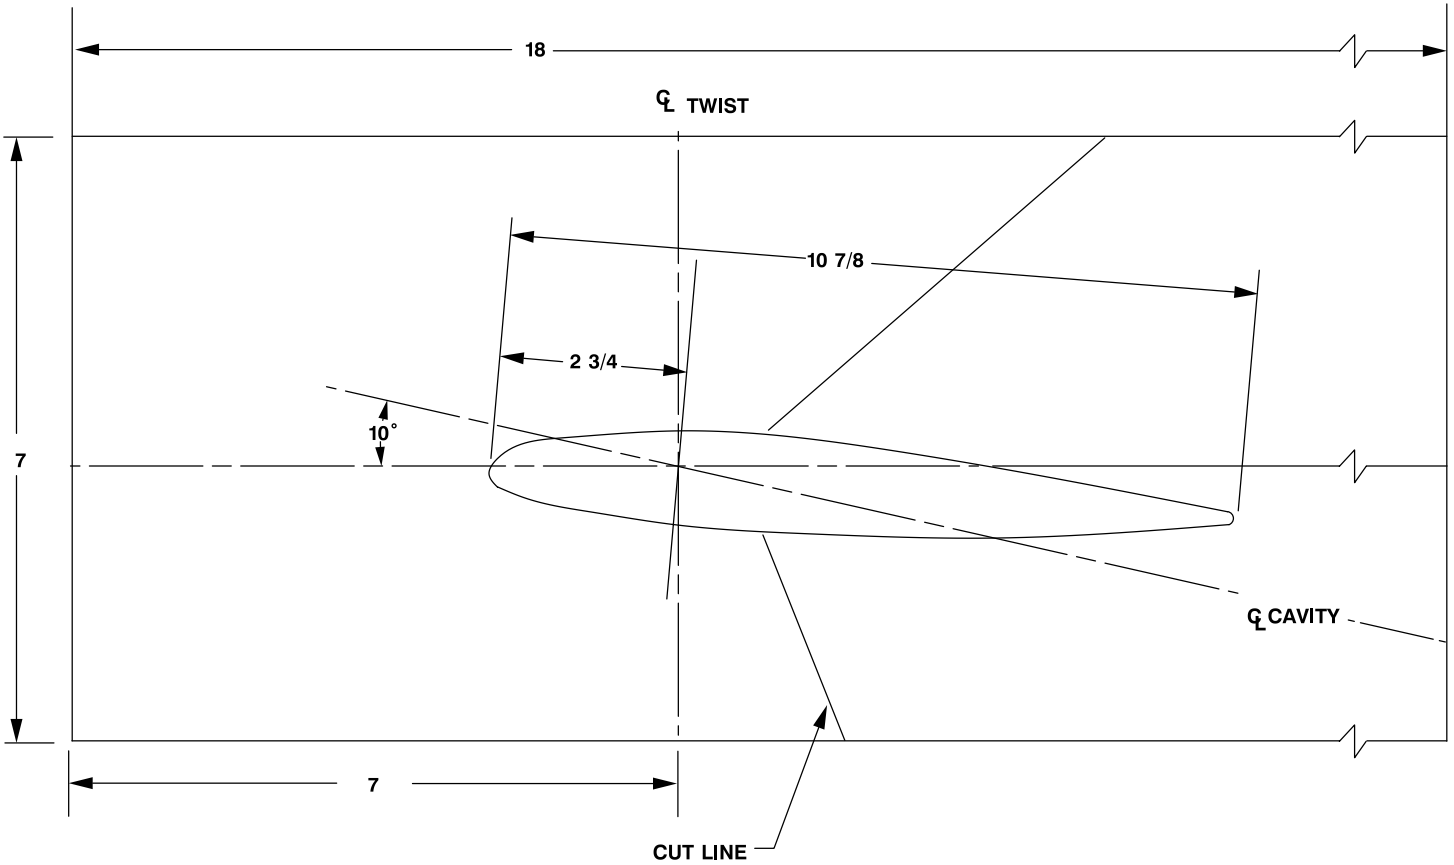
Main Rotor Blade Container (Sheet 2 of 6)
